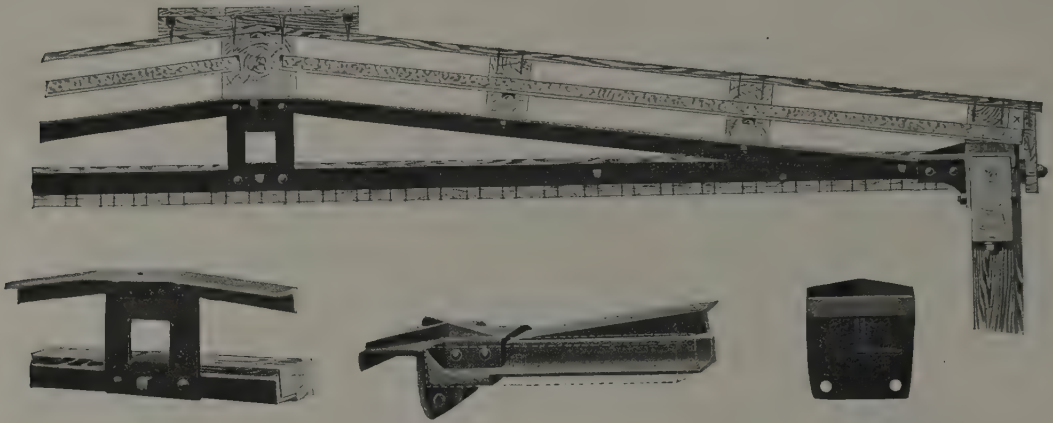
General arrangement of Chicago Trussed Steel Carline No. 21 for Box and Refrigerator Cars. Chicago-Cleveland Car Roofing Company.
